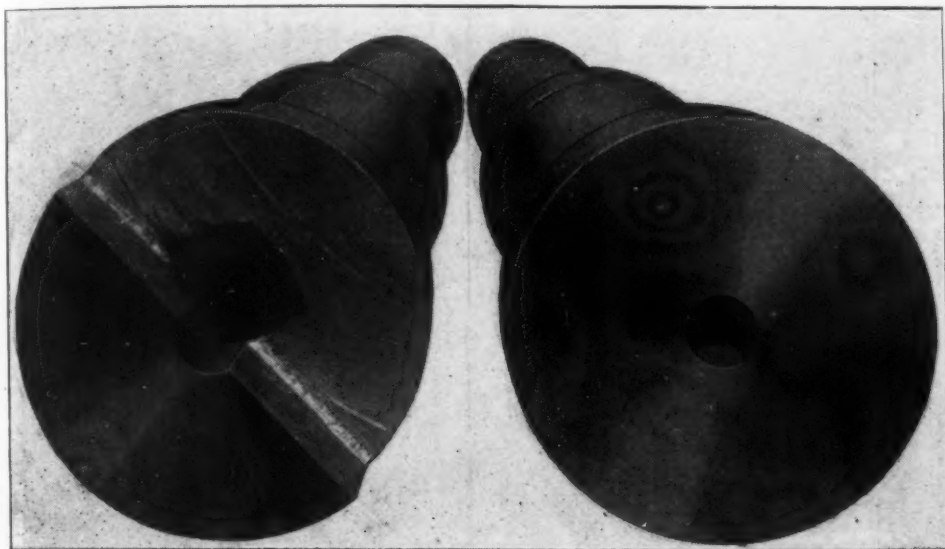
Hollow Boring for the Purpose of Removing Defective Centers of Forgings. The Forging on the Left Shows a Defect.
